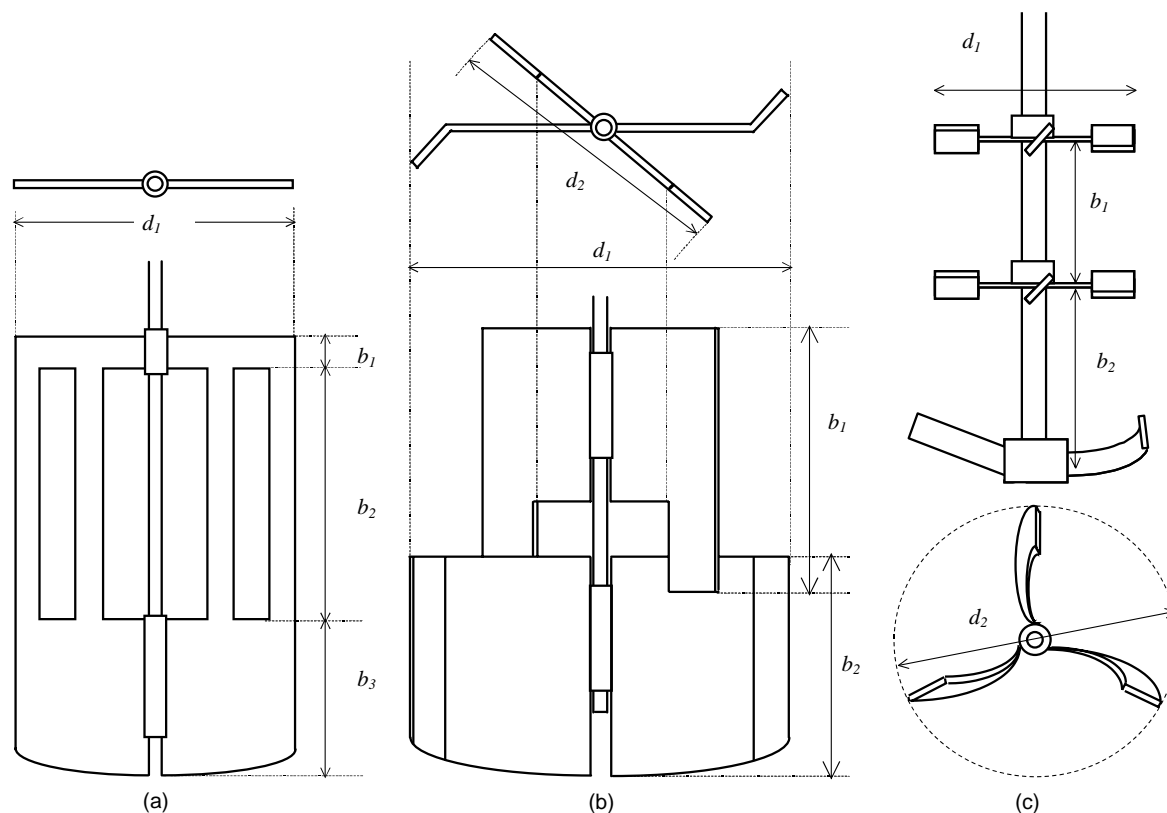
Impellers used in this study: (a) Maxblend impeller, (b) Fullzone impeller, (c) triple-impeller system.
